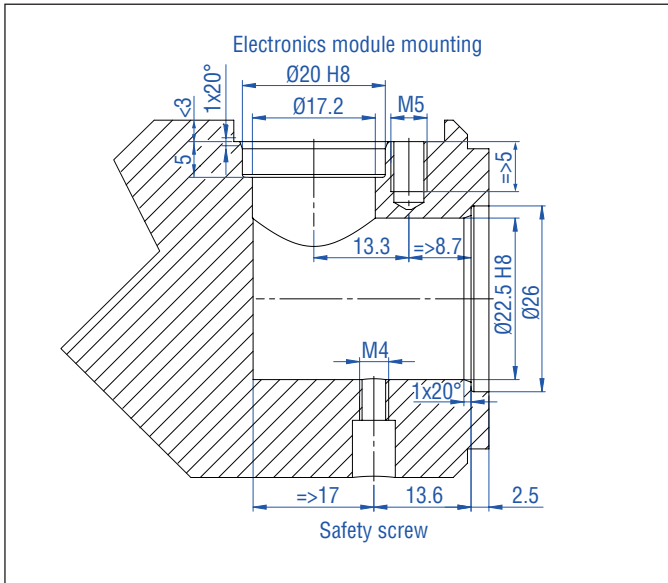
Mounting dimensions for Sensing Element and Electronics Assembly
